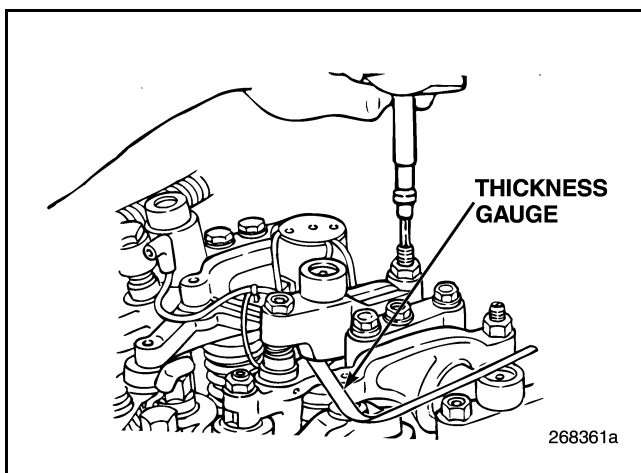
Adjusting Engine Brake Hydraulic Actuator Lash
